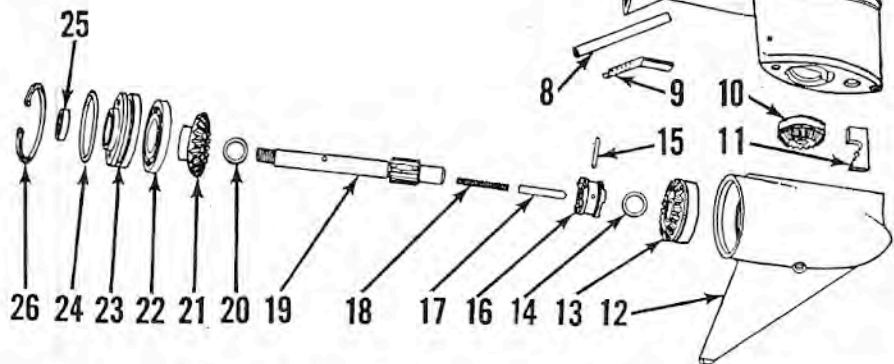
Exploded view of lower unit gearcase, drive shaft housing and associated parts used on early models.
